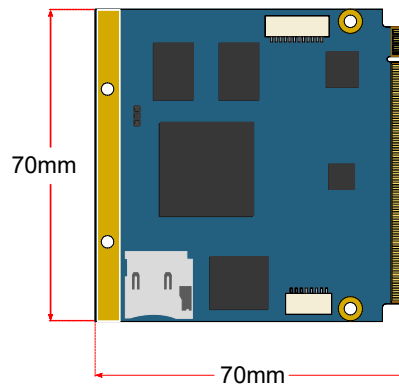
Dimensions of the VIA QSM-8Q60 module (top view)
